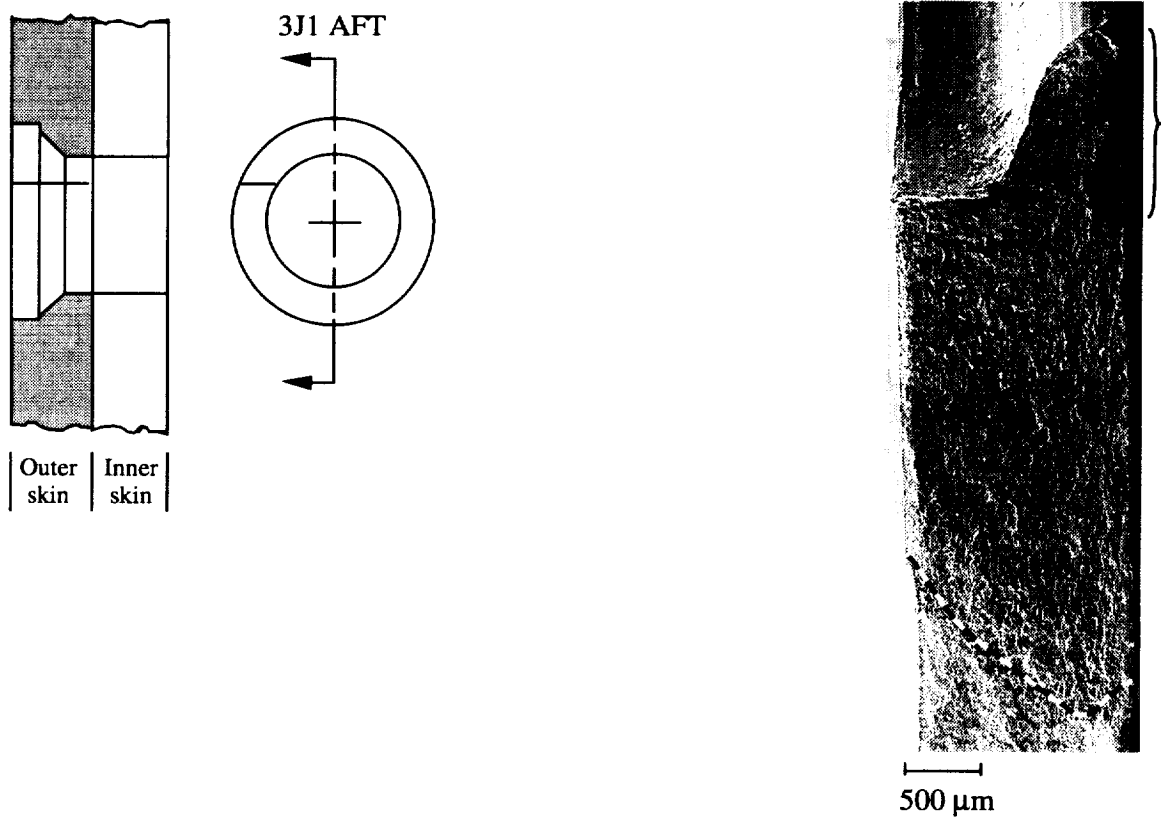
a) The schematic shows the rivet hole 3J1 configuration and the location of the outer skin fatigue crack oriented in the aft direction and about the 10 o'clock position. b) The SEM micrograph shows the through-thickness fatigue crack and the rivet hole (top). The bracket shows the likely crack initiation region along the faying surface and the dashed line marks the fatigue crack front. Considerable oxide was noted in the region of crack initiation.
